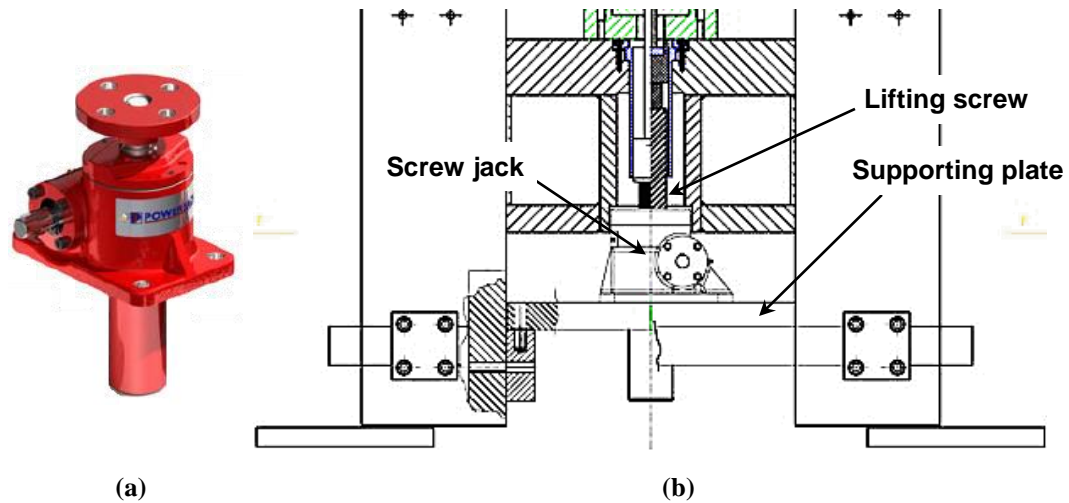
(a) Power jack translating 200 kN screw jack and (b) illustration of the screw jack installation on the I-ECAP rig
